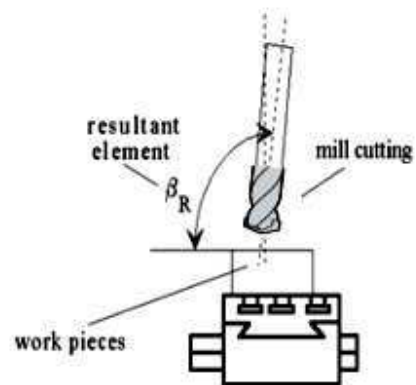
The Resultant element of the chain dimension, perpendicularity between axle of the mill- cutting and the plan orientating surface.
